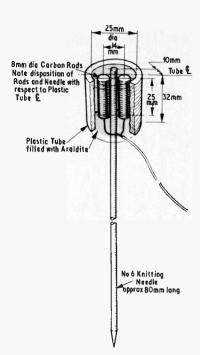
A completed sensor (above) showing the dimensions in mm and simplicity of construction
